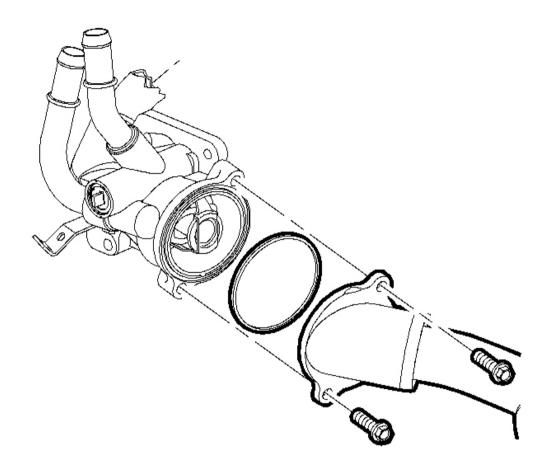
View Of Thermostat Cover Bolts Courtesy of GENERAL MOTORS CORP.
